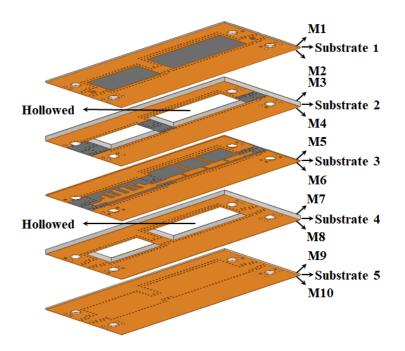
Bottom 3-D exploded view of the proposed cascaded Chebyshev SISL BPF.
